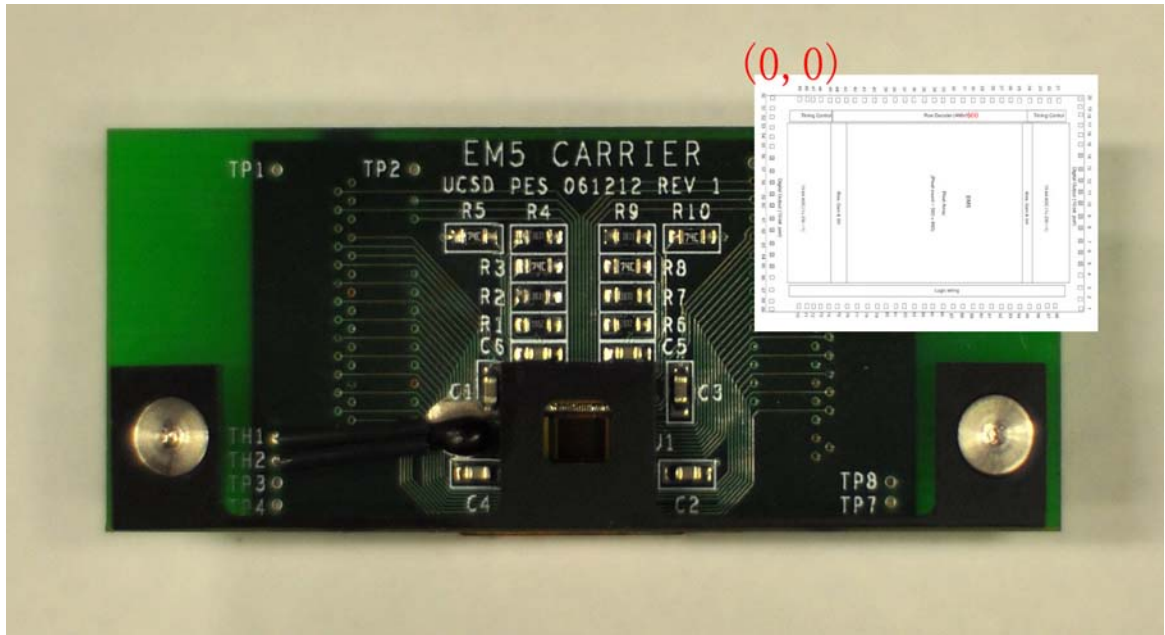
Photo of the EM5 carrier board with mounted sensor chip.
